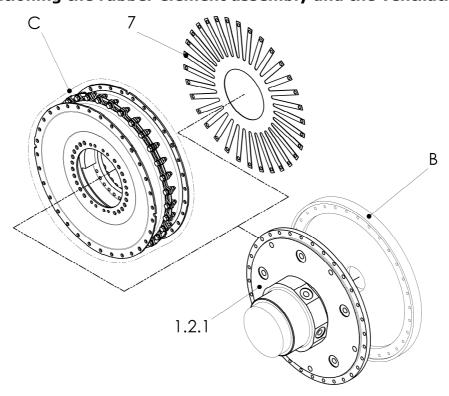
Positioning the rubber element assembly and the ventilation plate
